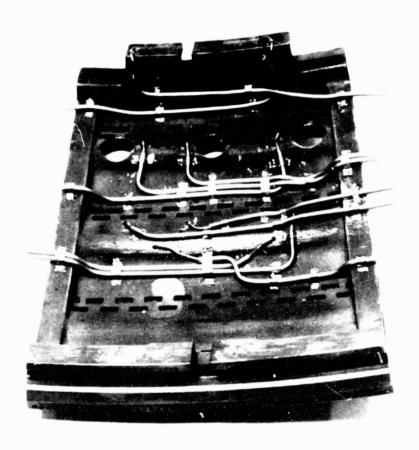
Combustor Component Instrumented Advanced Liner Segment
